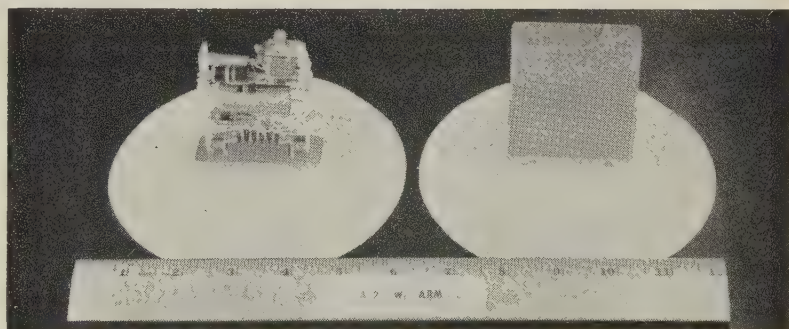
, unembedded assembly, and assembly embedded in epoxy resin
